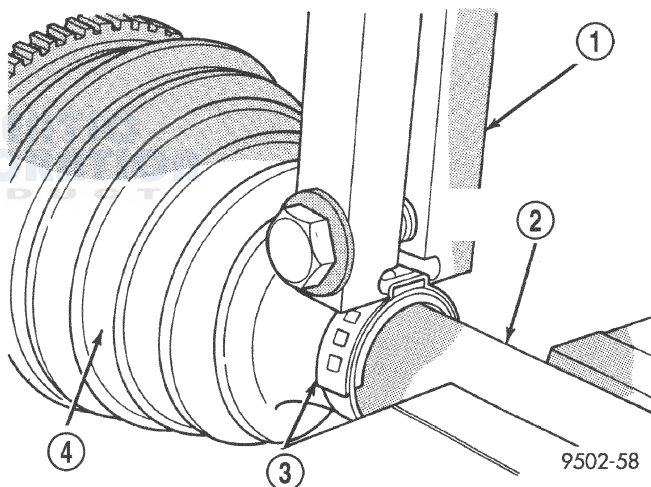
Outer C/V Joint Correctly Installed on Interconnecting Shaft
